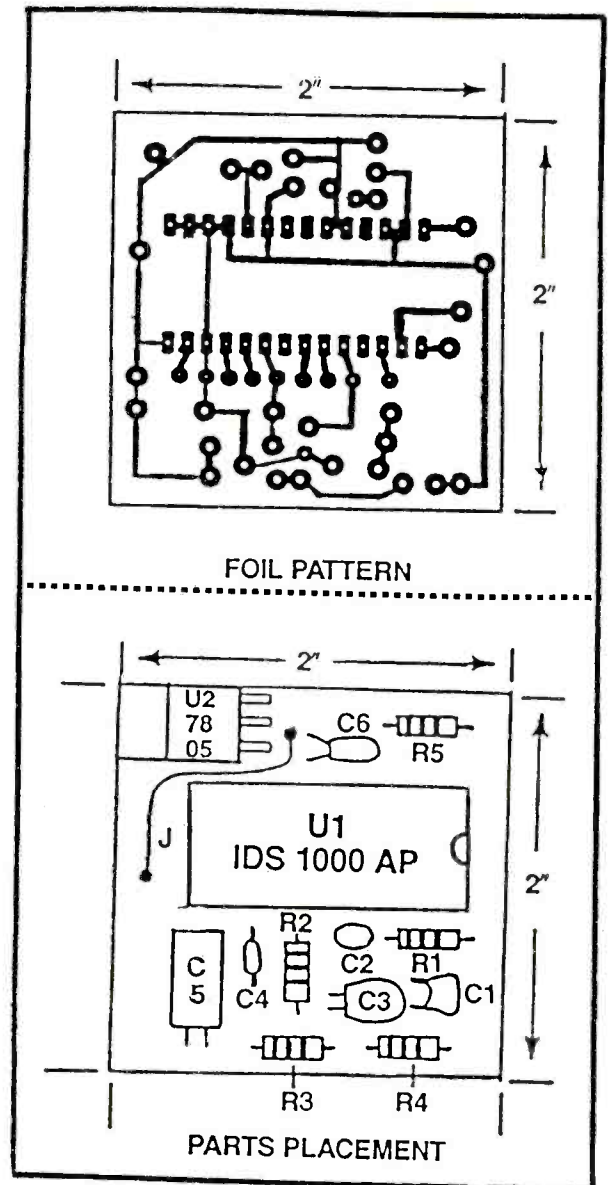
Printed Circuit Board Foil Pattern and Parts Placement Diagram.
